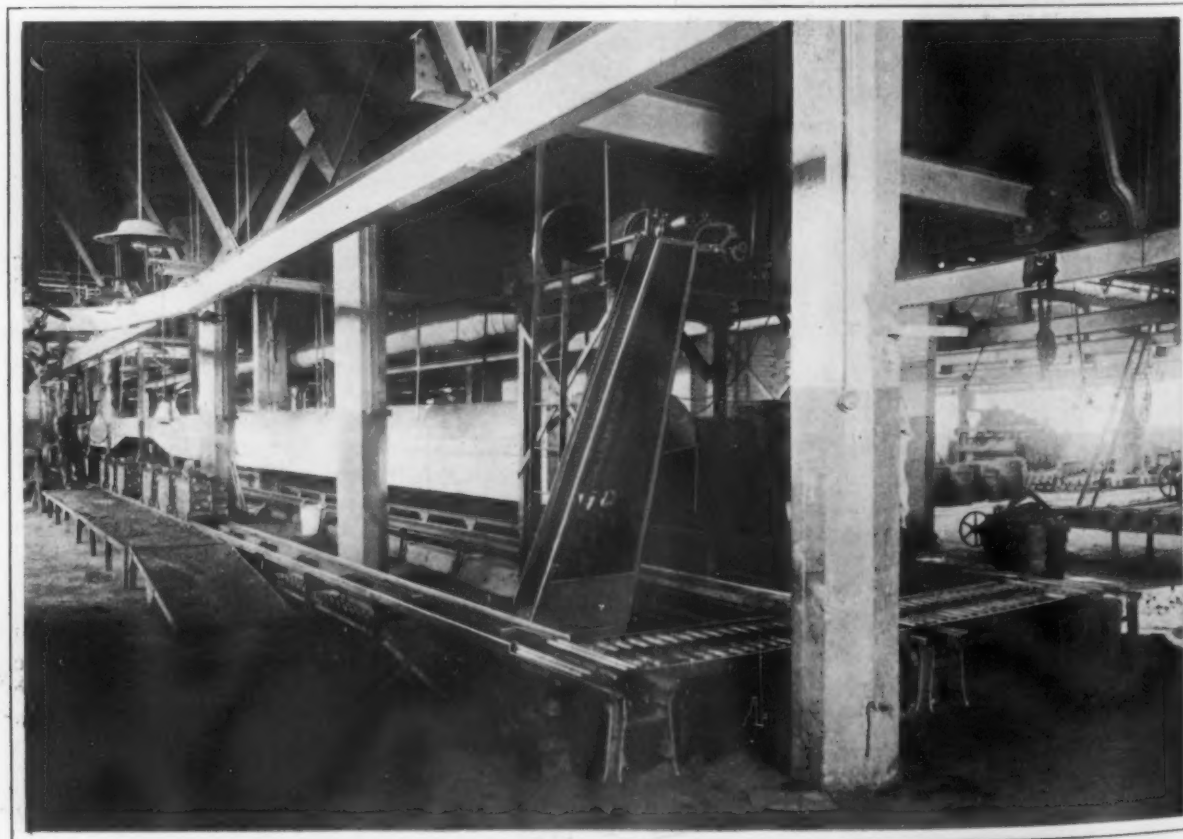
The Cylinder Mold Conveyor at Cupola End Showing the Roll Table Transfer and Conveyor Drive
